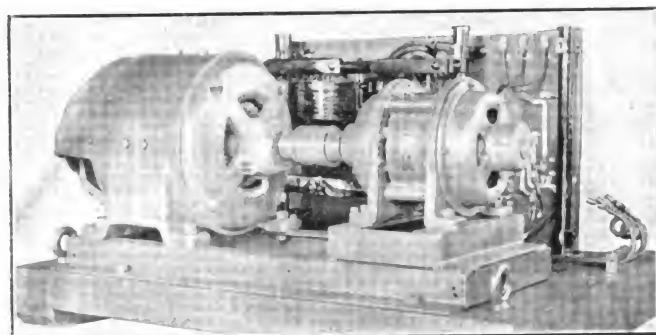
200-ampere compound arc welding generator (4 KW, 1,700 r.p.m., 60/20 V.), driven by 7½ h.p. motor (1,800 r.p.m., 60 cycle, 440 V.) with control panels mounted on wooden skids
